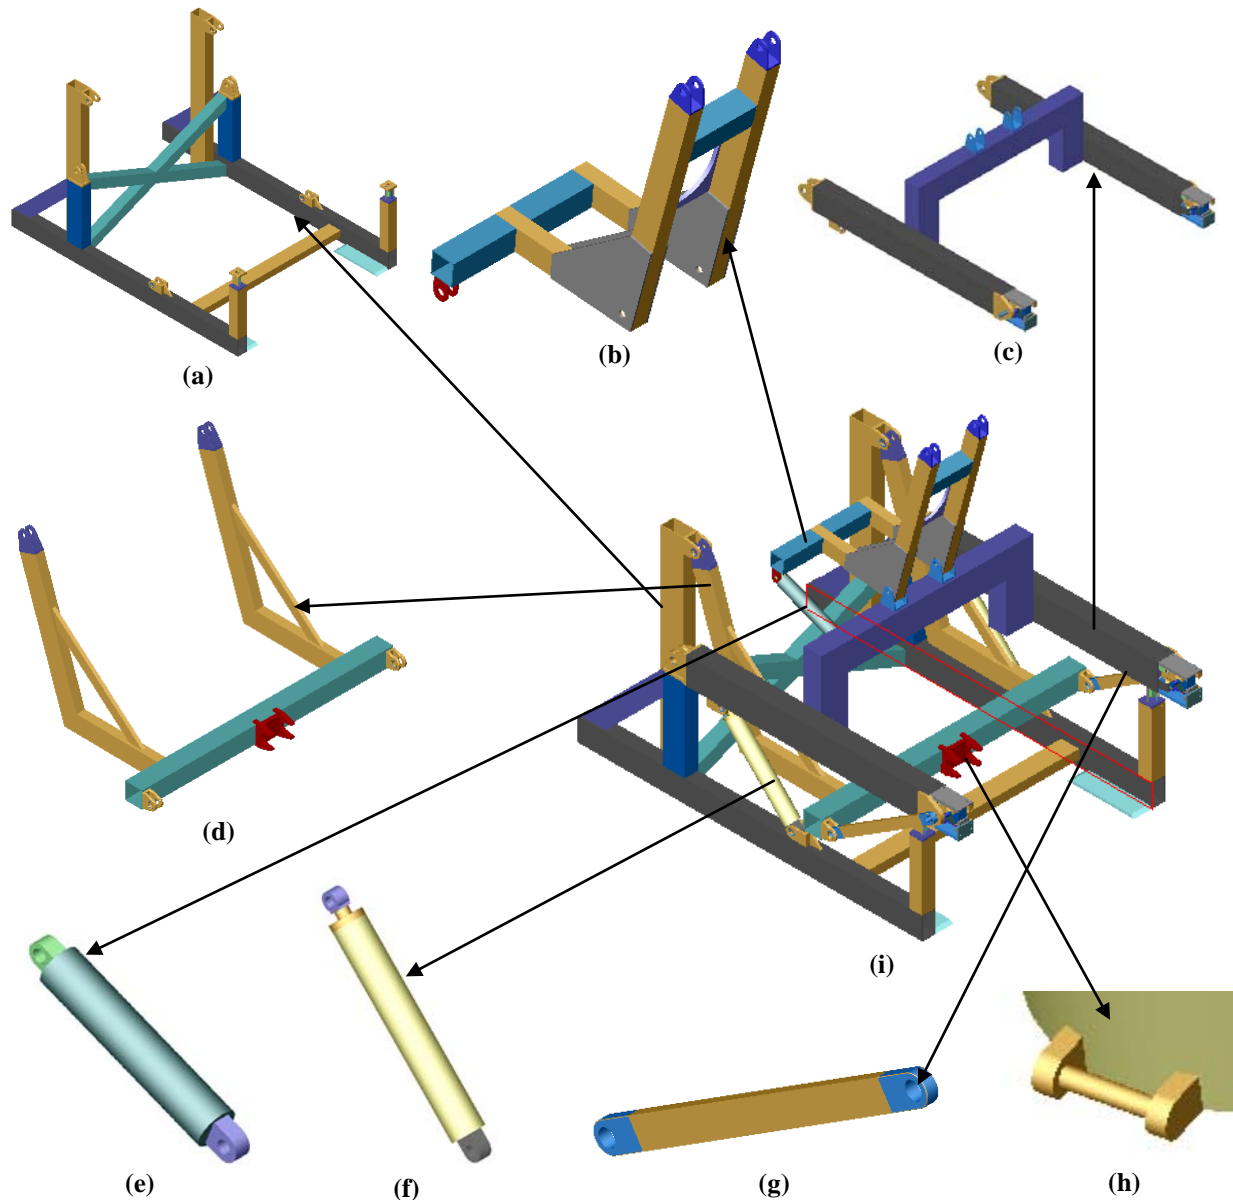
, Embodiment for the lifting / rotating mechanism with 8 major components (a) base post, (b) lid lifting mechanism, (c) primary arm, (d) secondary arm, (e) 8" Hydraulic actuator unit , (f) 14" hydraulic actuator unit, (g) linkage arm, (h) modified joint on the hopper, which combined and formed the lifting/rotation mechanism in (i).
